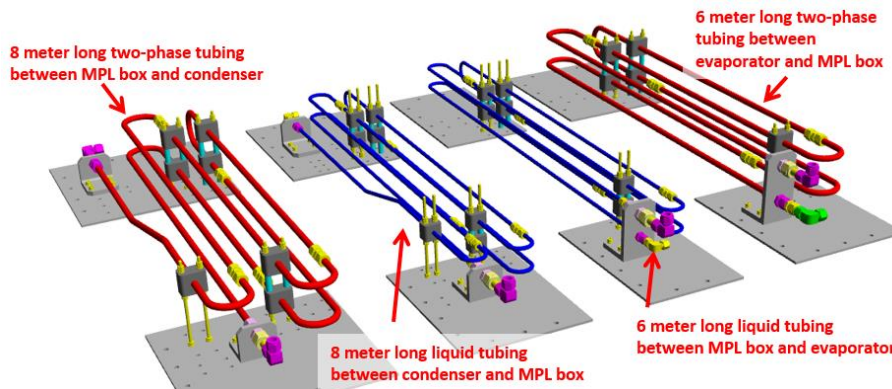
CAD drawing of the tubing between the MPL equipment box and the evaporator and condenser sections
